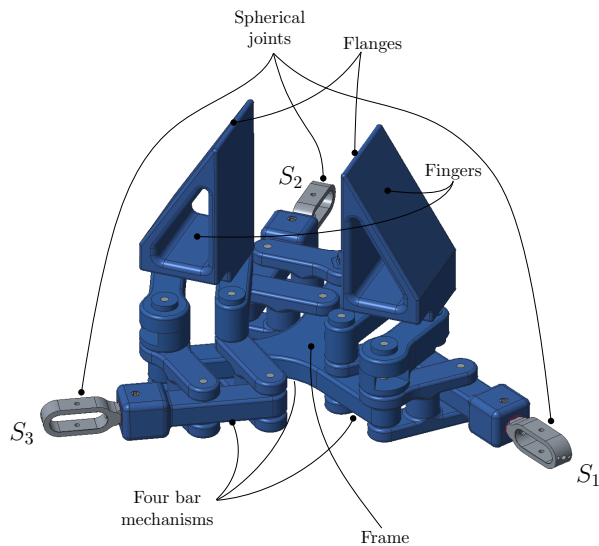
CAD model of the mechanism driving the gripper implemented in the prototype.
